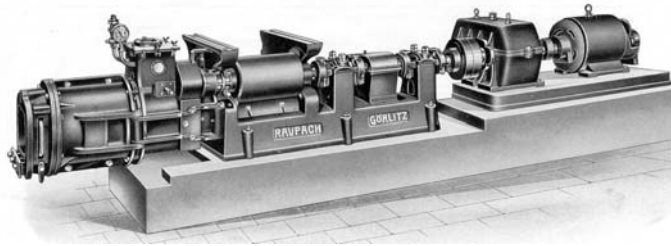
Extruder drive via gearbox with direct-coupled electric motor, 1935
